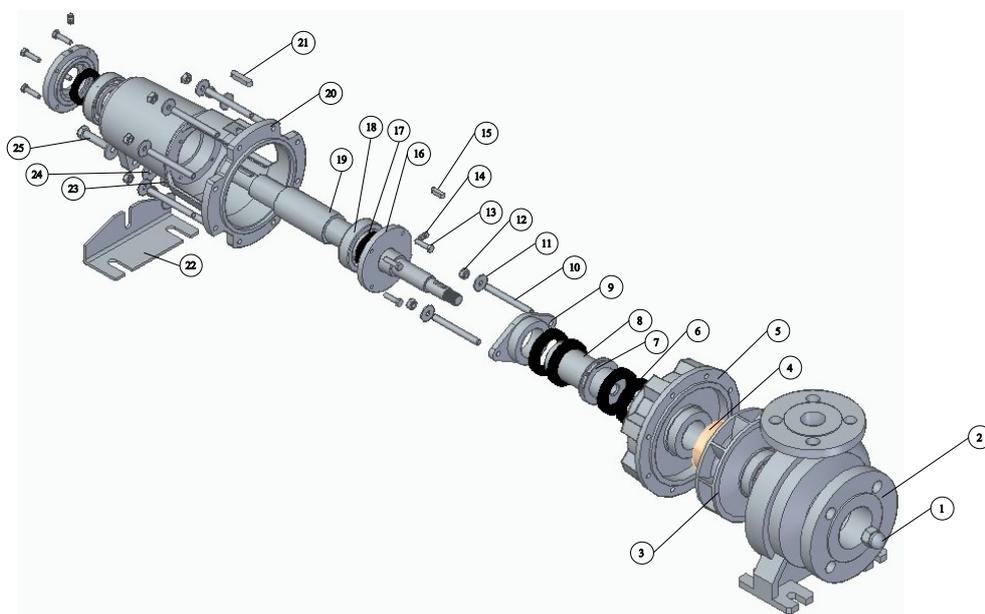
Exploded view (assembly 1 - centrifugal pump original design)
